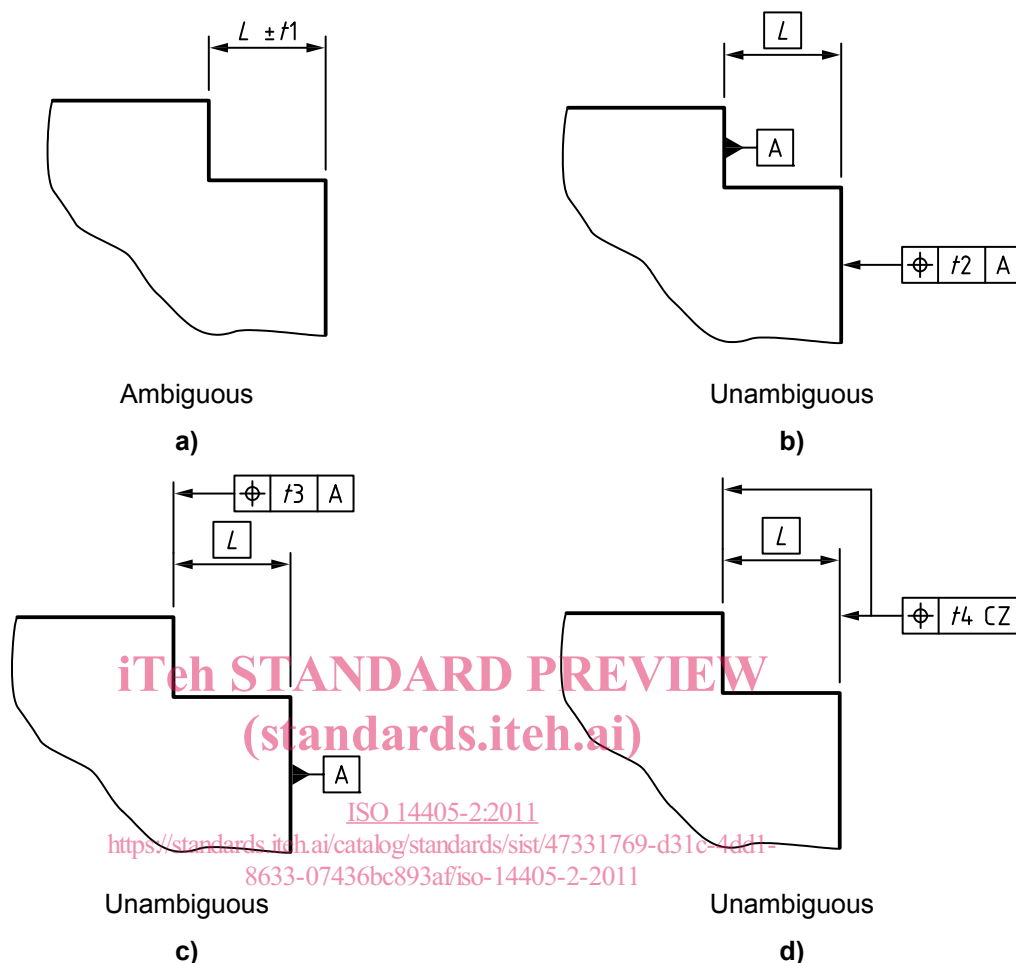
Example of a linear step dimension (a) and three different solutions using geometrical tolerances (b, c and d)
